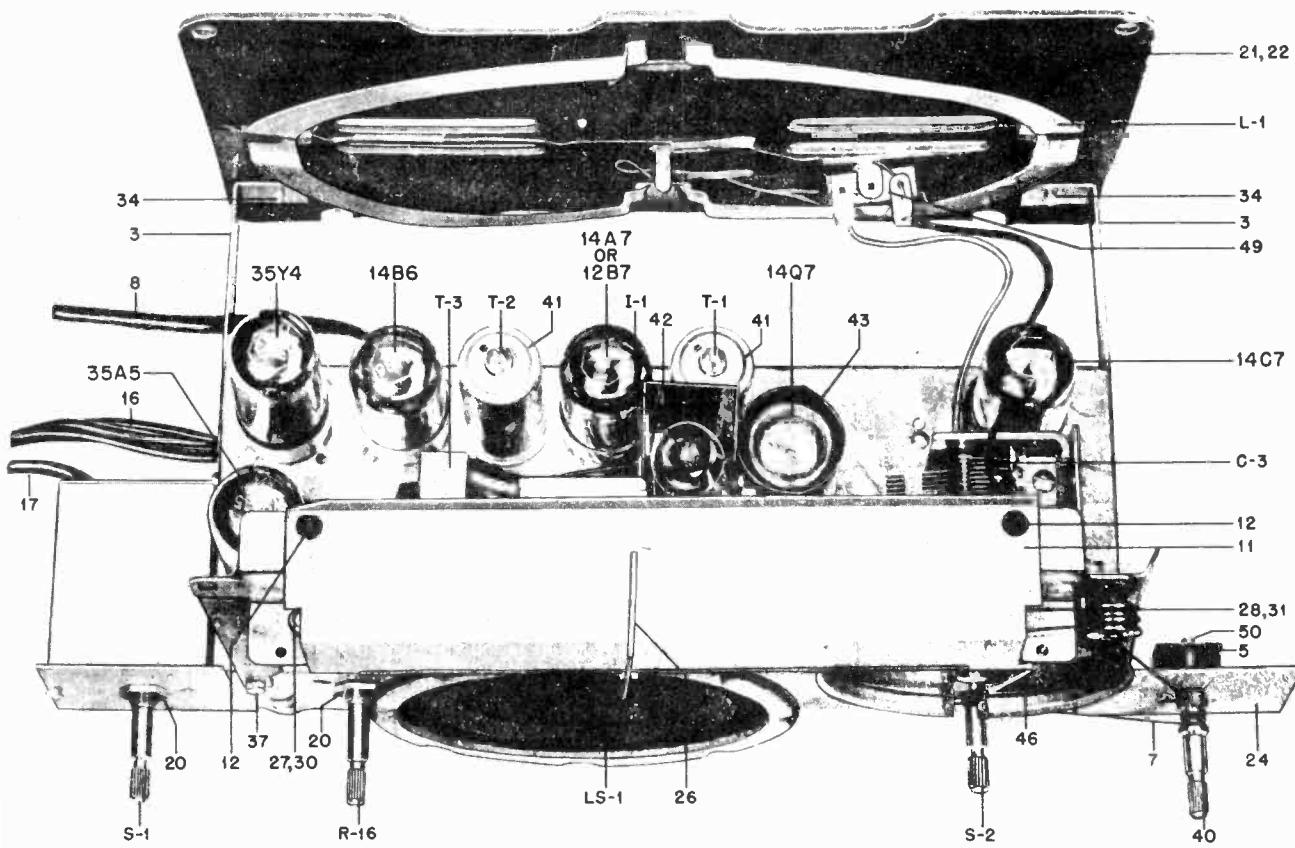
CHASSIS HS-122 PARTS LOCATIONS - TOP VIEW
